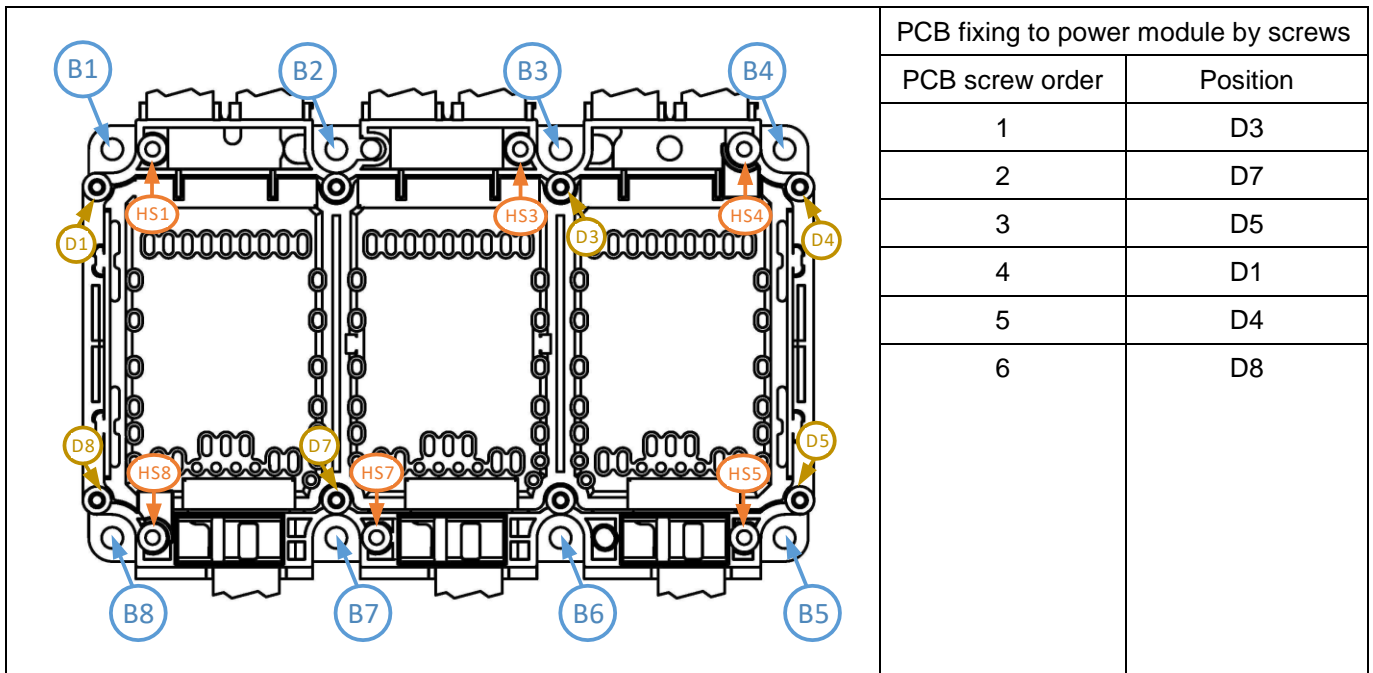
Indicated positions of PCB screws (Dx) with correct screw order listed in the table.
